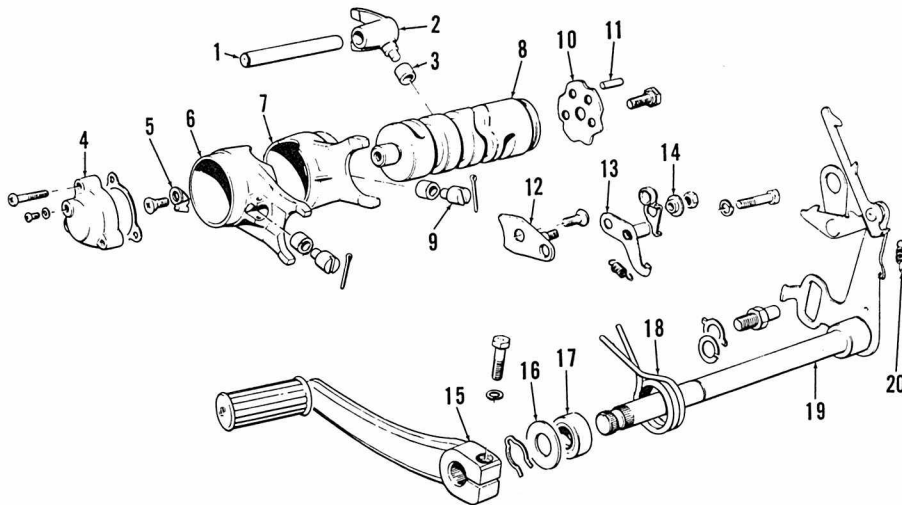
Shifter assembly used on AC 50 model. Other units are similar.
